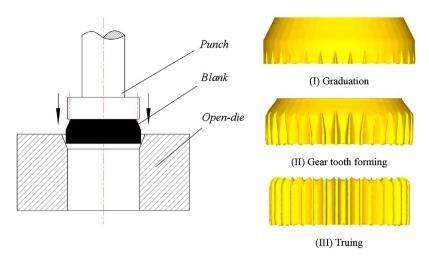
Model of warm extrusion of spur gear with open-die and forming process.
